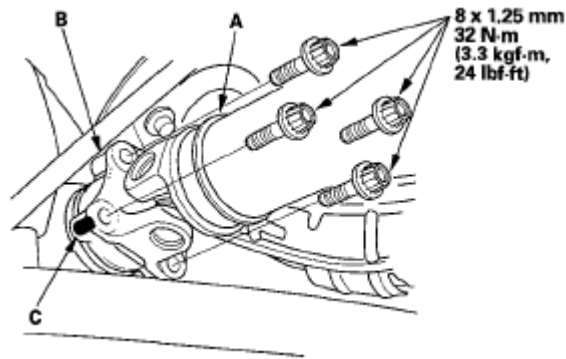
Identifying Propeller Shaft On Transfer Assembly And Reference Marks With Torque Specification
